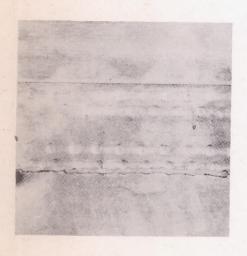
Lap joint specimens with three rows of spot welds Specimens 5" wide, with 2" overlap. Spacing between rows $\frac{1}{2}$ ". Note spots in adjacent rows staggered.
